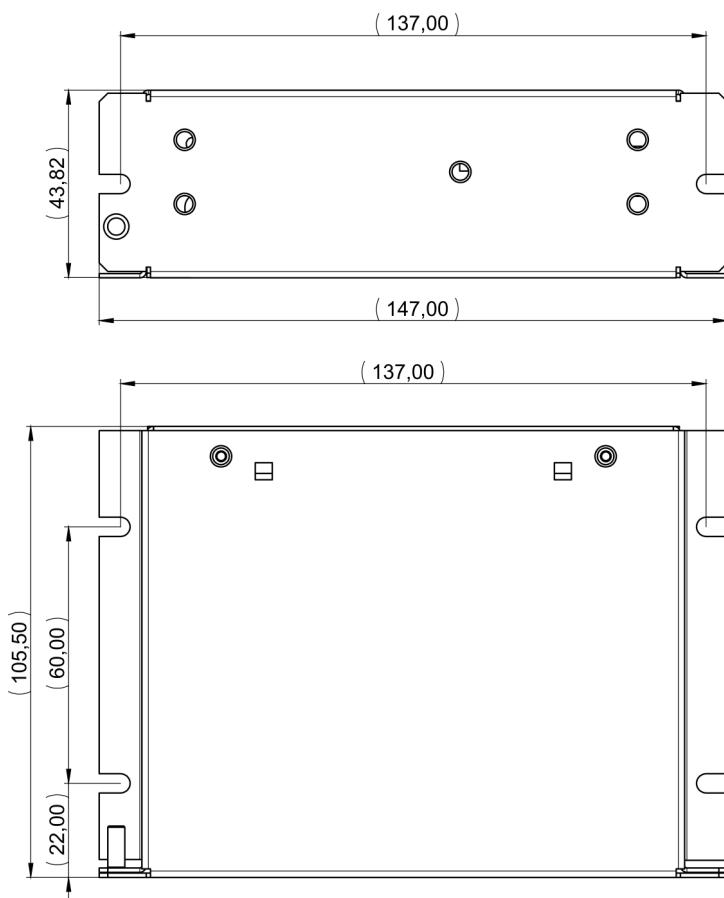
E-873.1AT: Dimensions and position of the recesses for mounting
